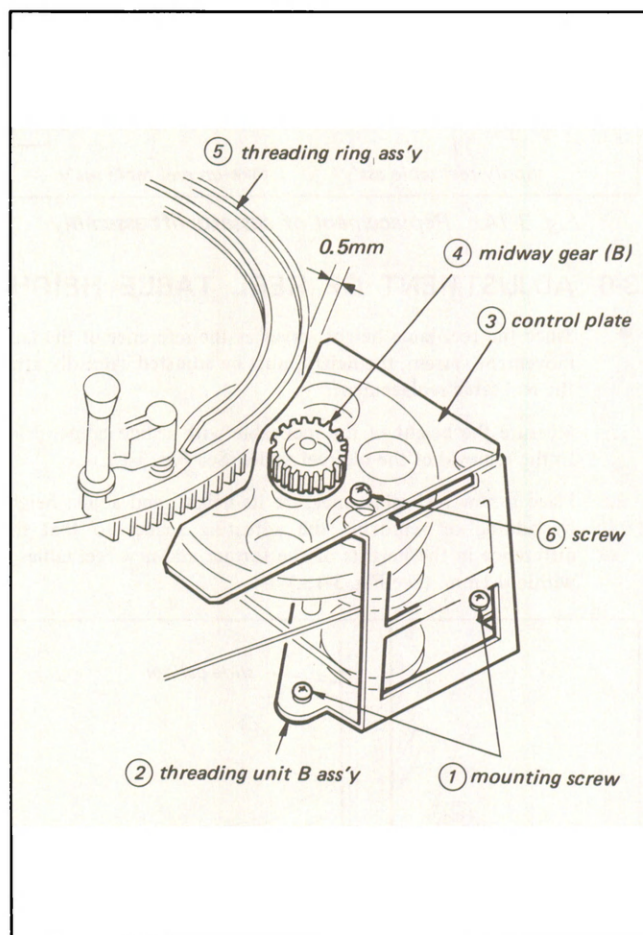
Position adjustment of threading unit B assembly and control plate
